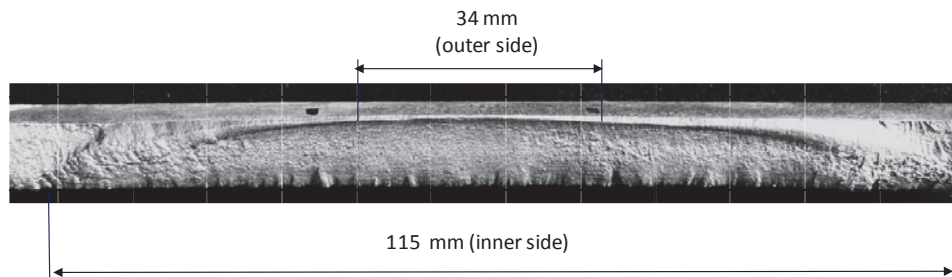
Shape and dimensions of the fatigue crack in the HAZ of the longitudinal weld in vessel # 6-342 & 6-341 (number of cycles at leak = 170977) .
